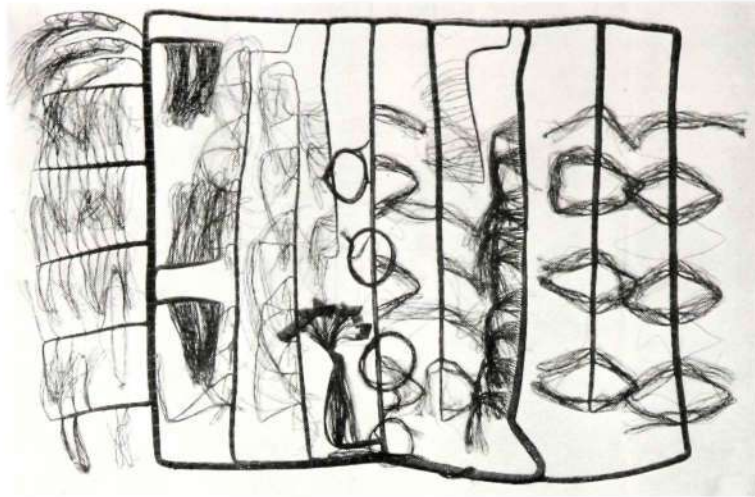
A completed cable of a P.B.X. apparatus rack.
